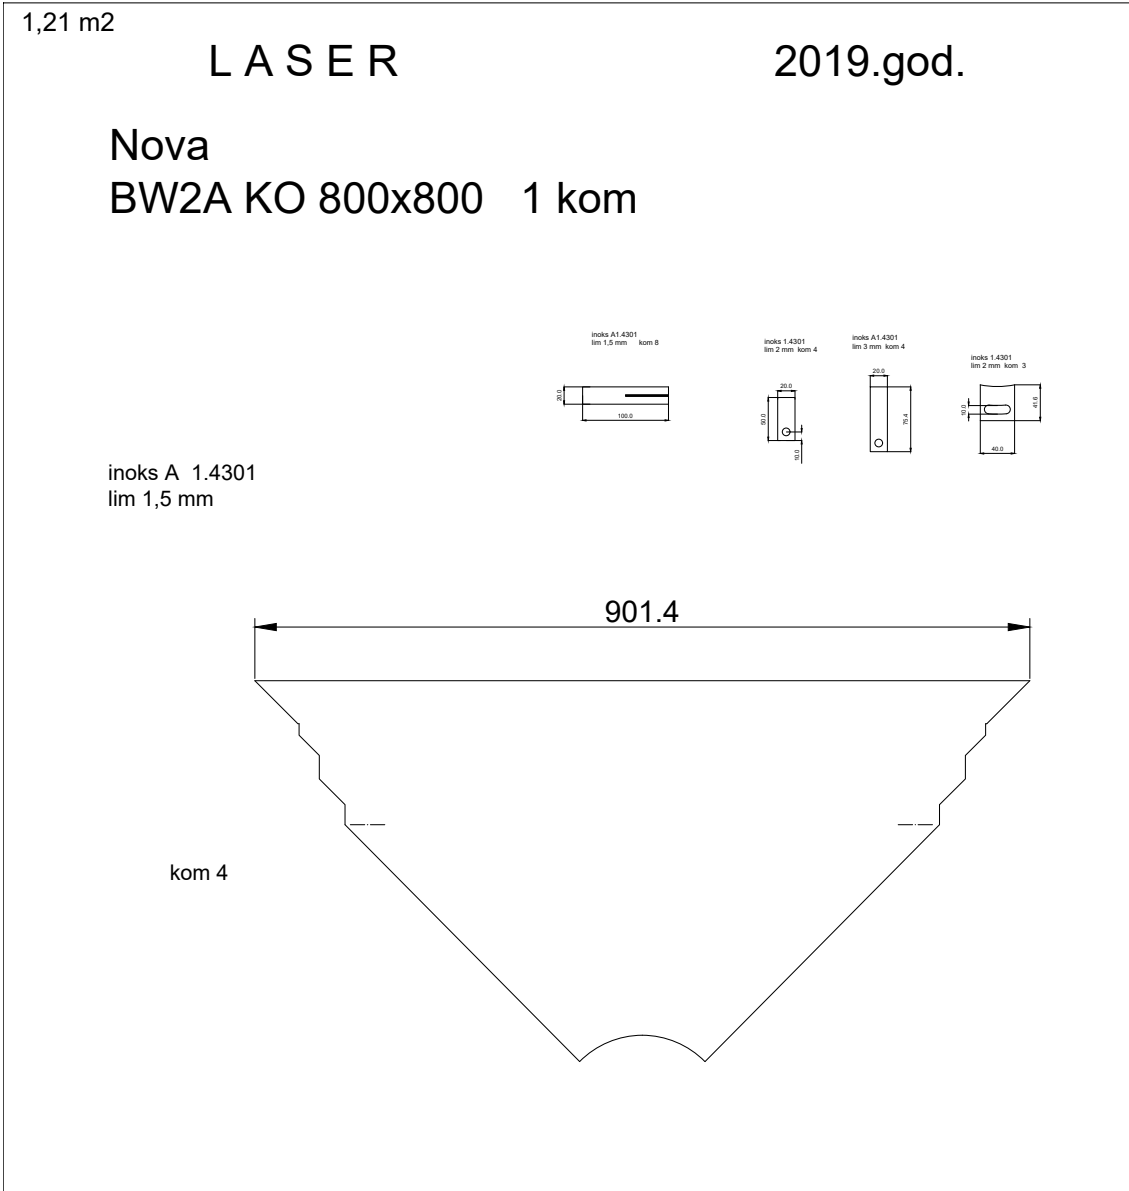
Laser drawing for new BOWA (Source: Own drawing)
